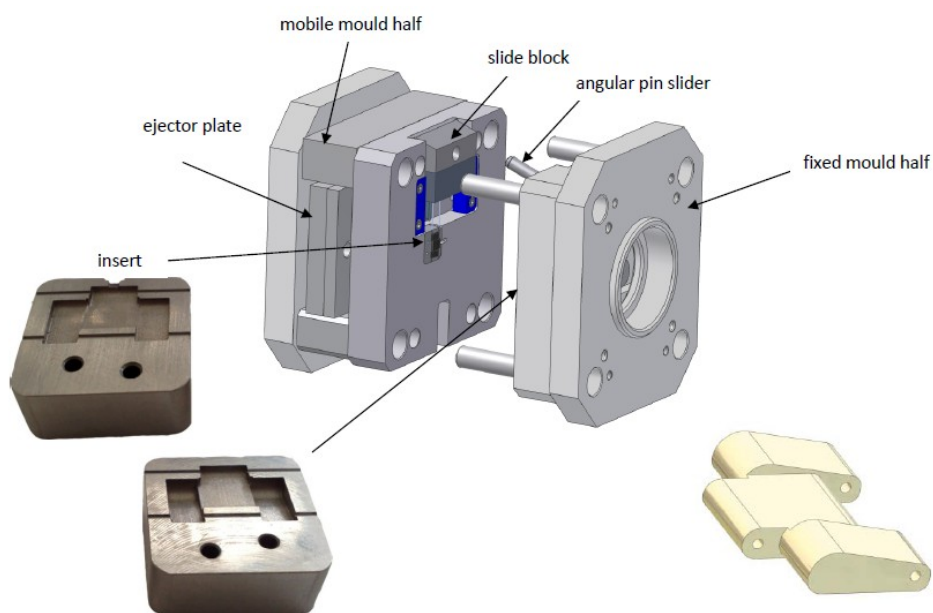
Tooling for moulding watch bracelet segments: mould frame, inserts and slide
